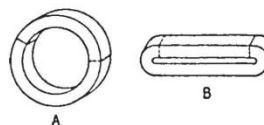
Location of Transverse Tension Test Specimens in Ring Cut from Tubular Products.
